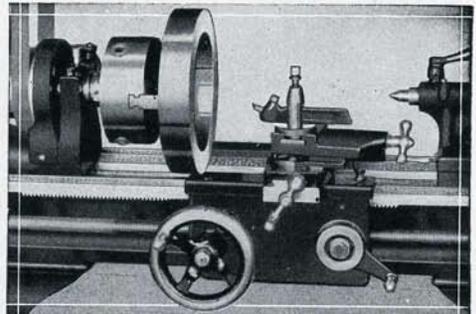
Swinging Work, Over the Lathe Bed, That Measures $9\frac{1}{4}$ Inches in Diameter
